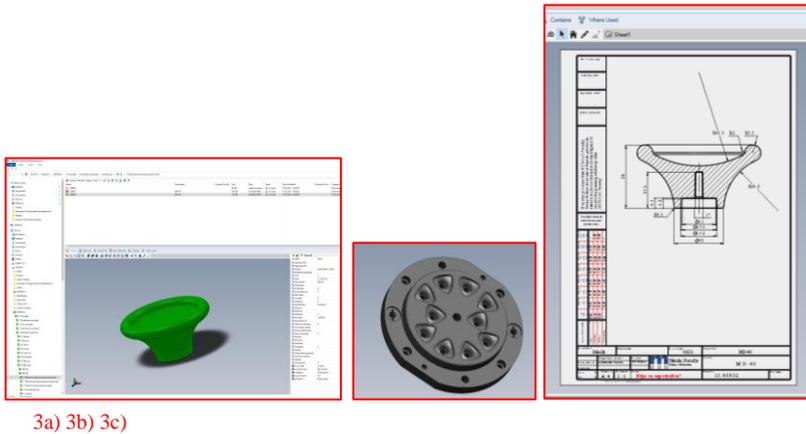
Part model (3a), bottom plate model (matrix) (3b) and part drawing (3c)
